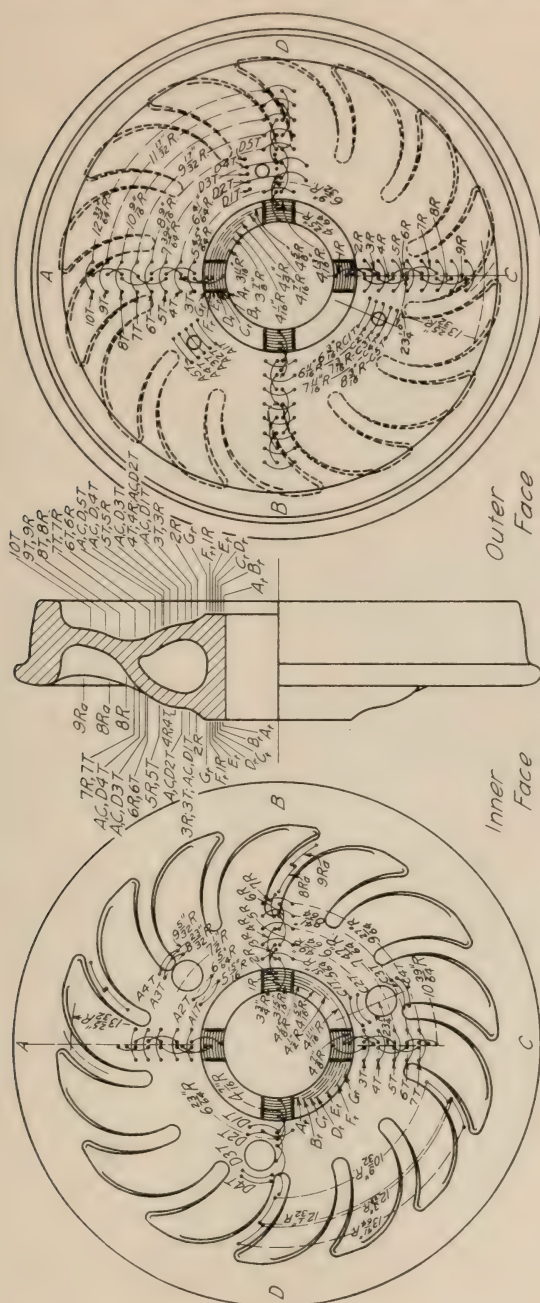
LOCATION OF GAGE-LINES ON 33-IN. 725-LB. M. C. B. WHEEL No. 49 317
